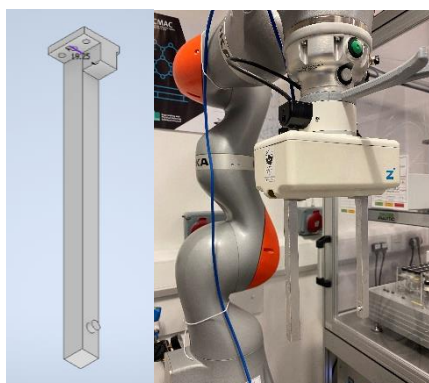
CAD drawing of the gripper finger (left) and a picture showing the gripper attached to a Zimmer Gripper connected to the Kuka IIWA (right).
